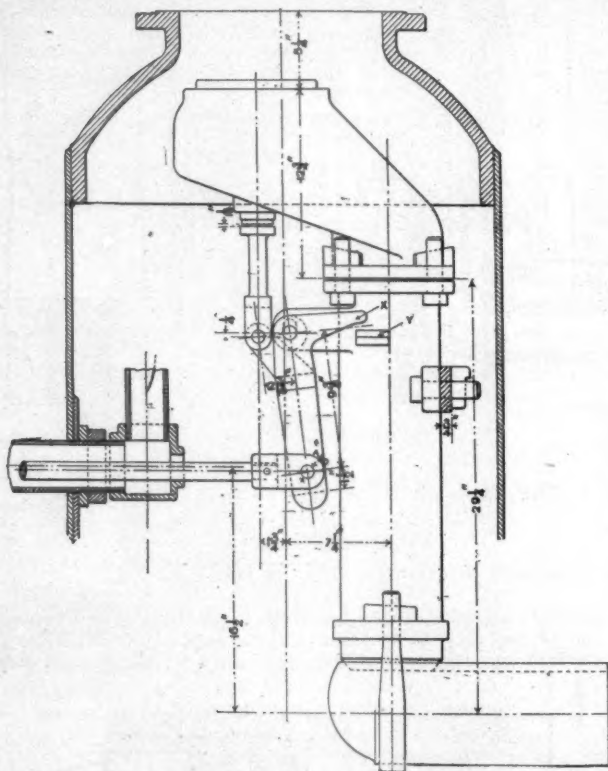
AND 3.—SECTIONAL ELEVATION AND PLAN.
